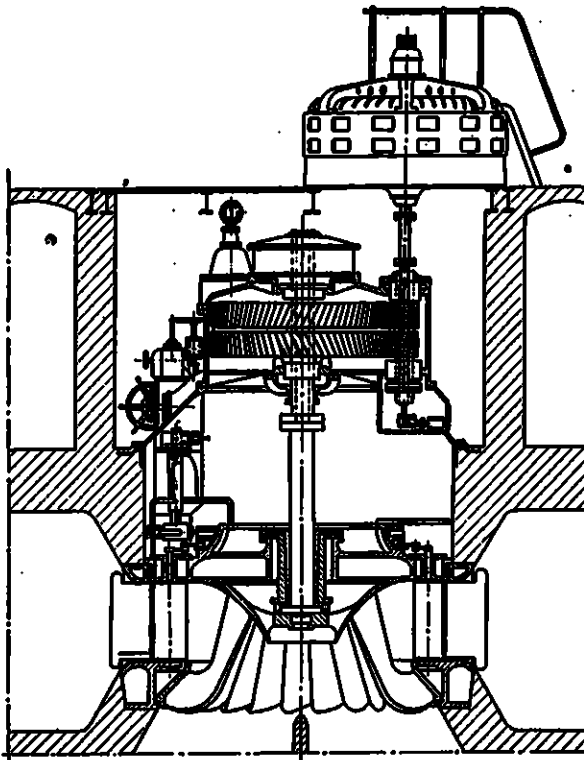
Sketch of arrangement of generator driven by water turbine through precision gear for gearing up the speed.
